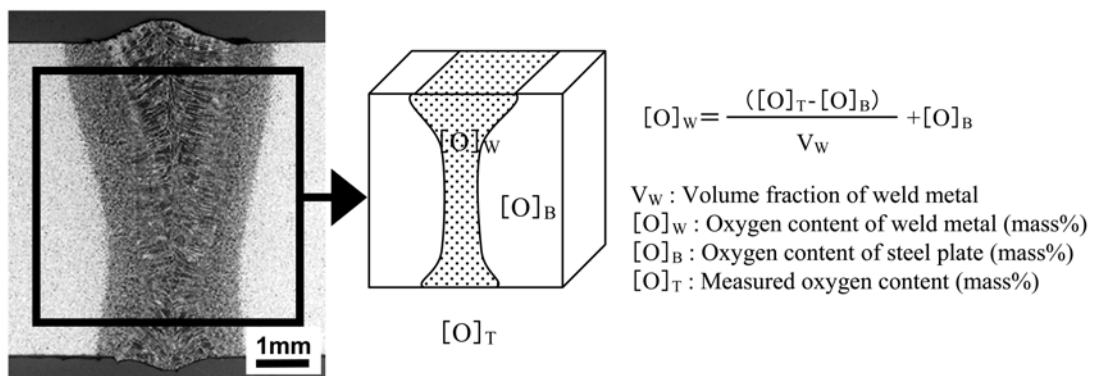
Oxygen analysis method for laser weld metals.
